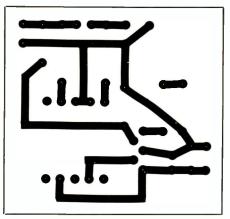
Actual-size etching-and-drilling guide to use for fabricating a printed-circuit board for the Tiny Switcher.
